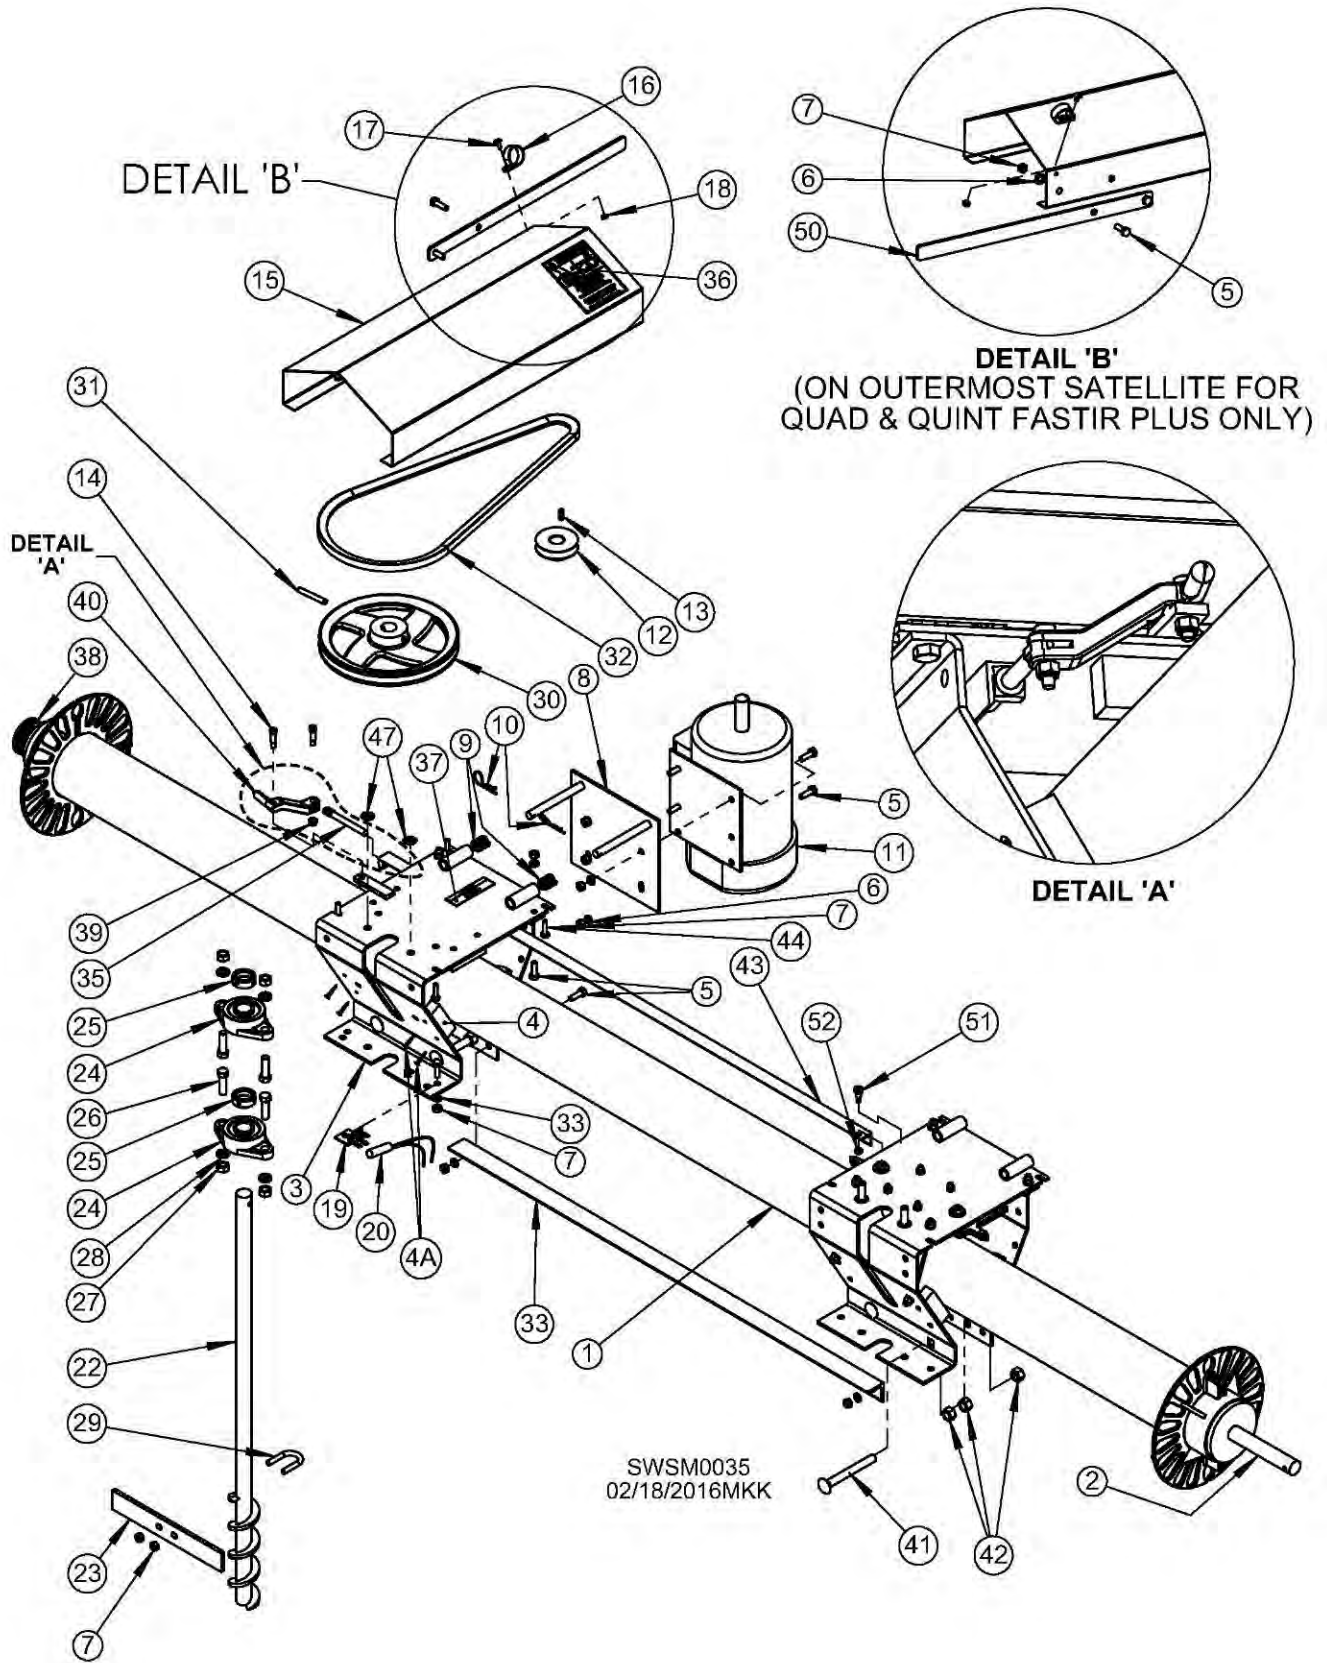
Satellite Wrap-Around Carriage, Exploded View
